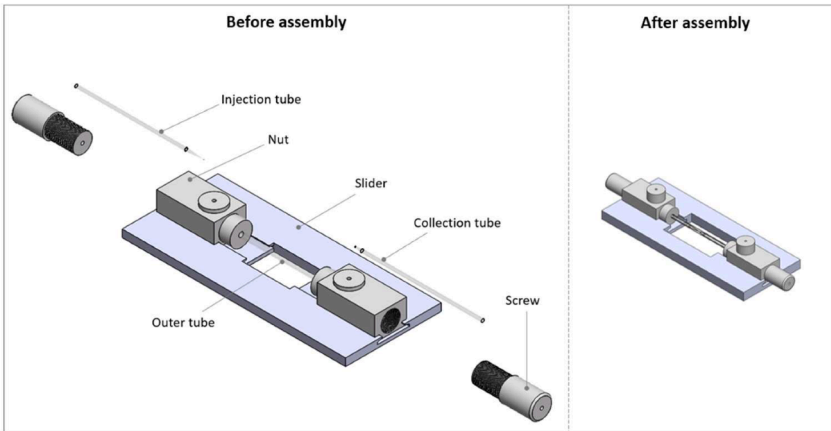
A 3D CAD drawing of the microfluidic device before and after assembly.
